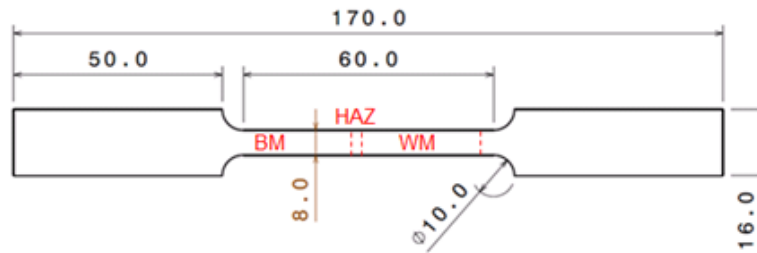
Tensile test specimen dimensions (all dimensions are in millimetres)
